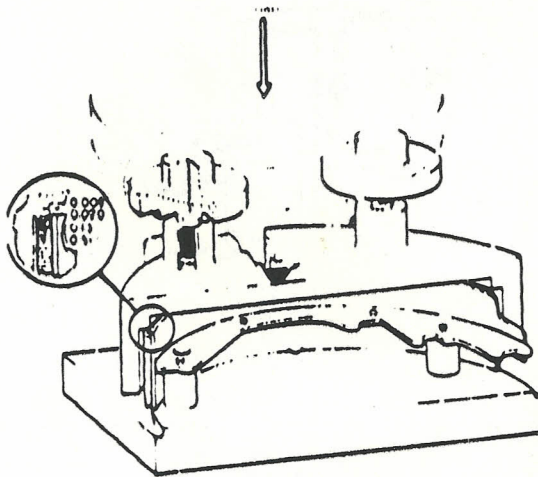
BOND PLANE SHEAR TEST—DRUM BRAKE
